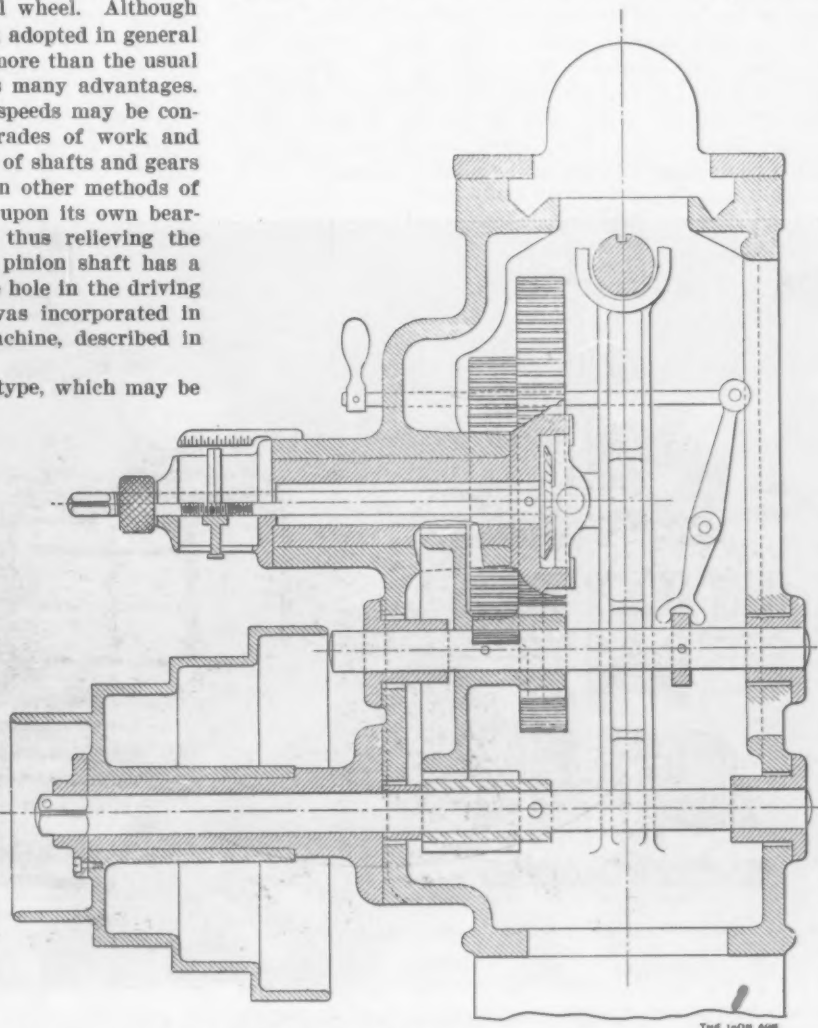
Sectional View of the Eberhardt Crank Shaper.
